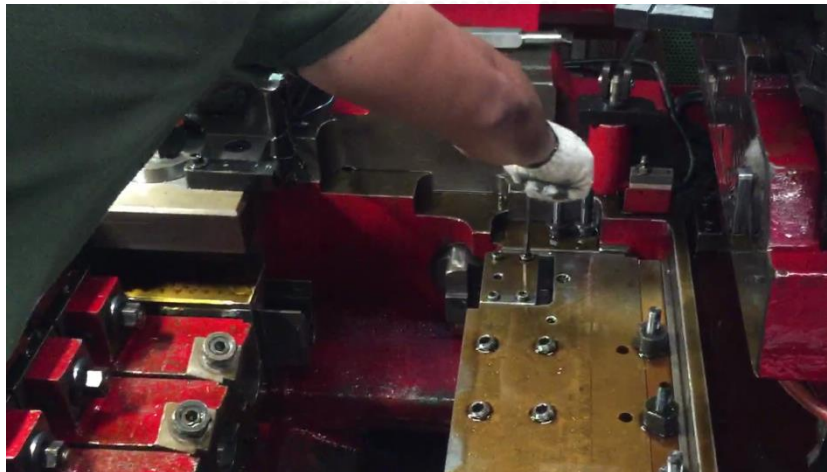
Step 5A Dismount the previous wire toolings out of machine
